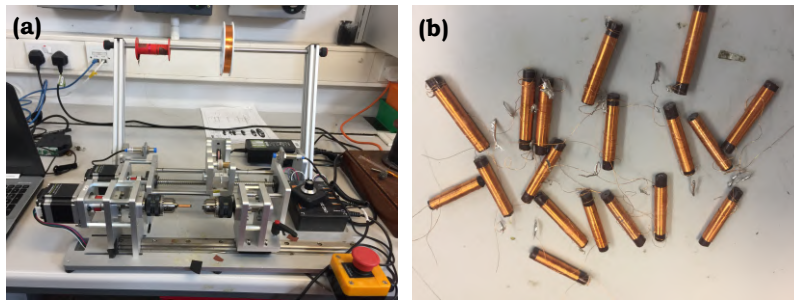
(a) CNC coil winding machine used for the bars winding, and (b) inductor bars after winding.
